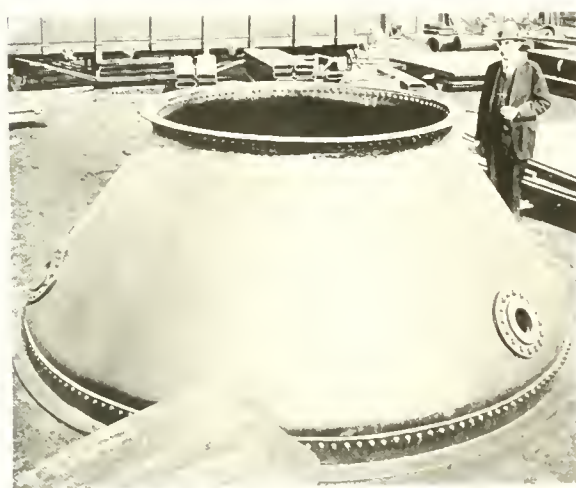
Vacuum Pan for Sugar Boiler made of boiler plate in three pieces. The vertical electric welded seams in these pieces save a difficult and expensive flanging operation.
